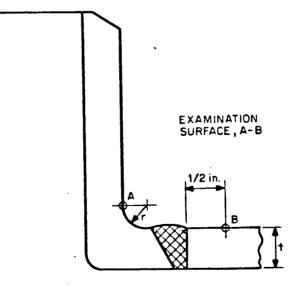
NOZZLE-TO-VESSEL WELDS
